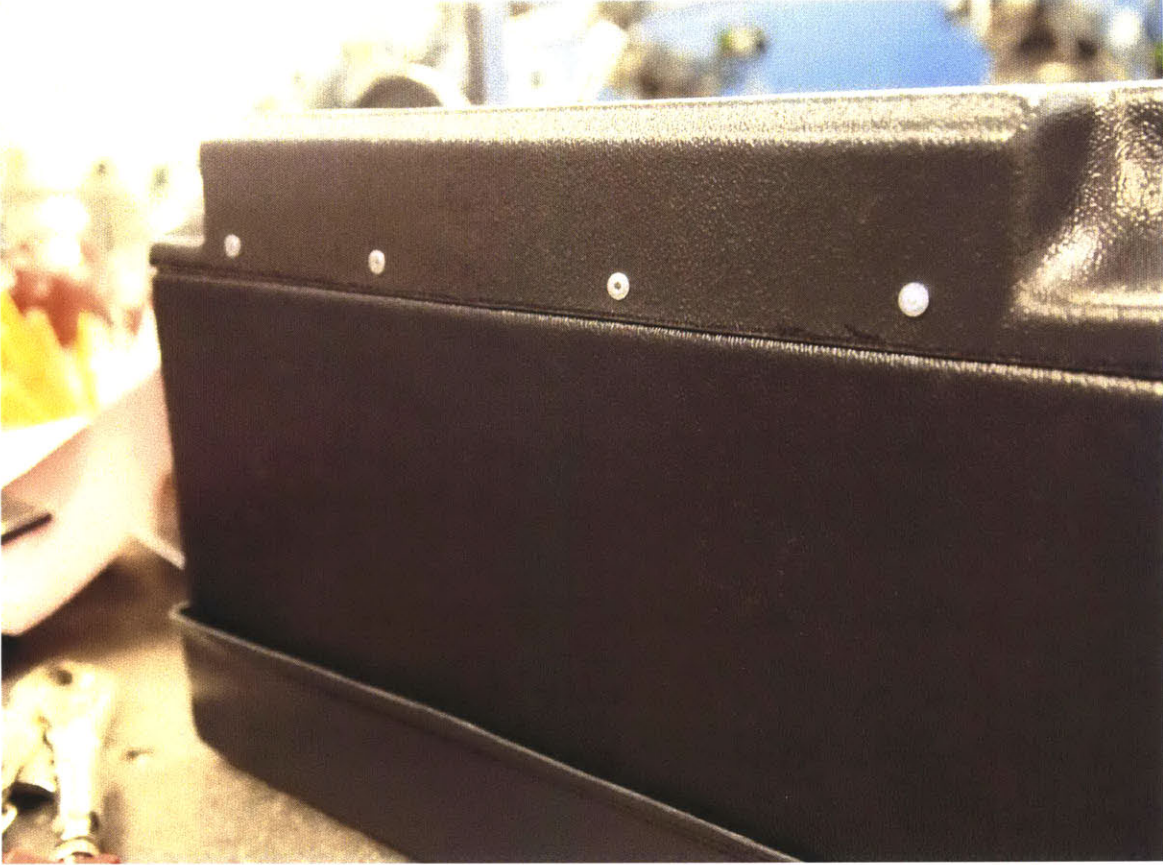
The bottom panel (facing upwards) riveted to a side panel.
